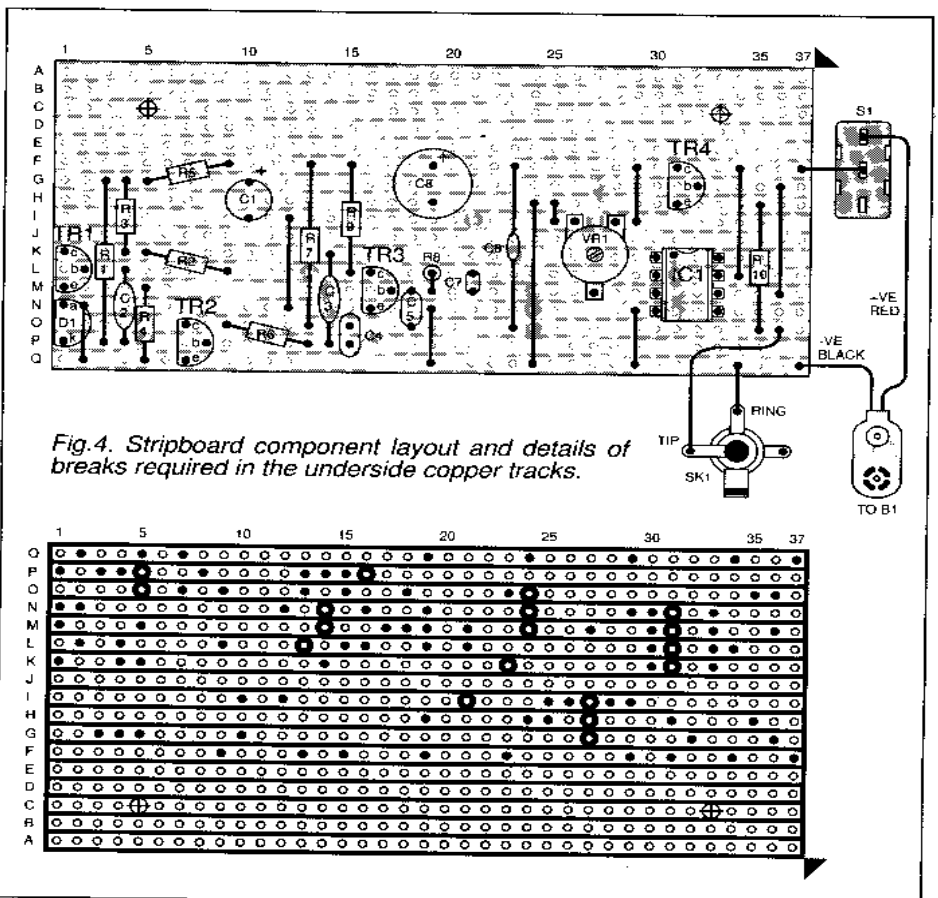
Stripboard component layout and details of breaks required in the underside copper tracks.
